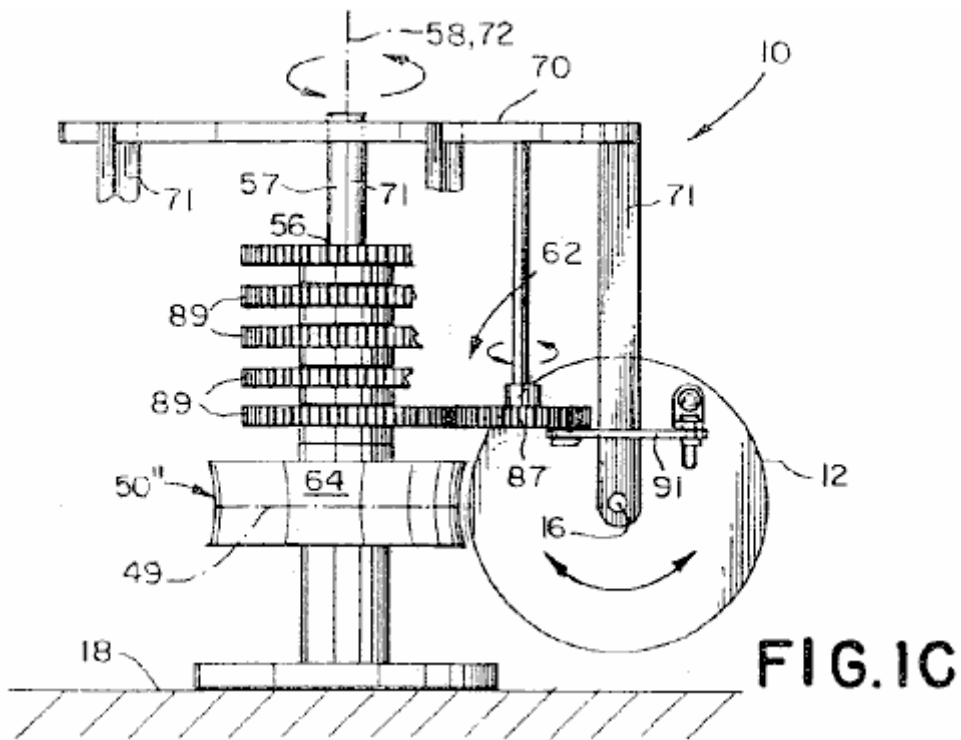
C is a schematic perspective drawing of a third preferred embodiment of the motor;
